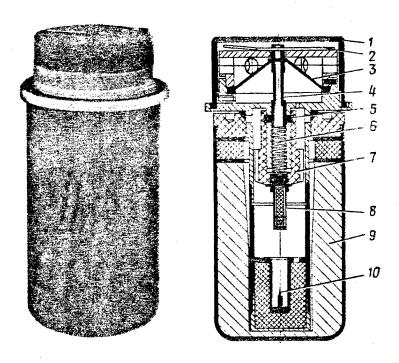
Overall view and design of LM-2 demolition charge: 1--Safety cap; 2--Safety pin; 3--Conical diaphragm; 4--Stem; 5--Retaining ball; 6--Striker spring; 7--Bushing; 8--Igniter; 9--Explosive charge; 10--Firing pin.
